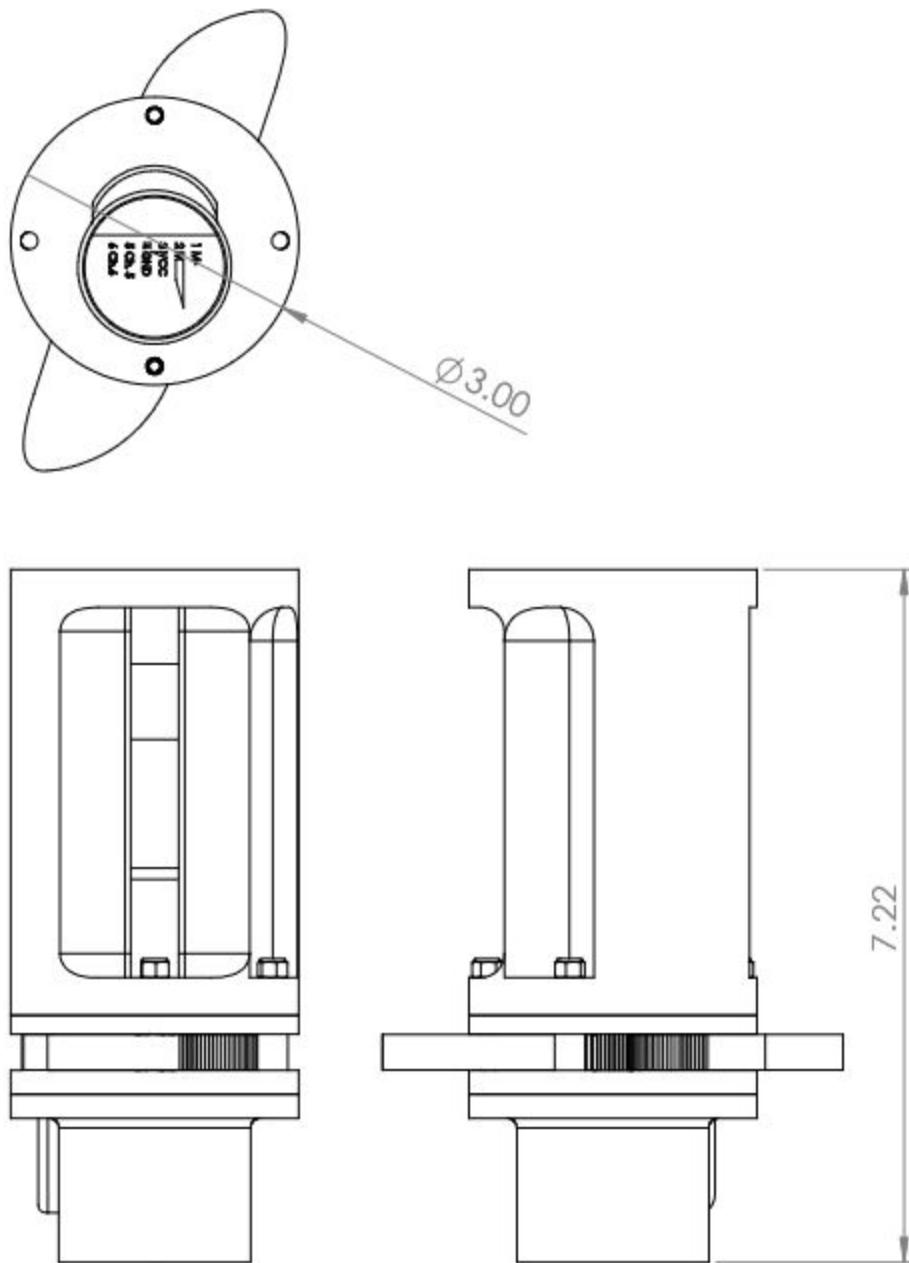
Shows the primary overall dimensions of the ADAS Assembly in inches
